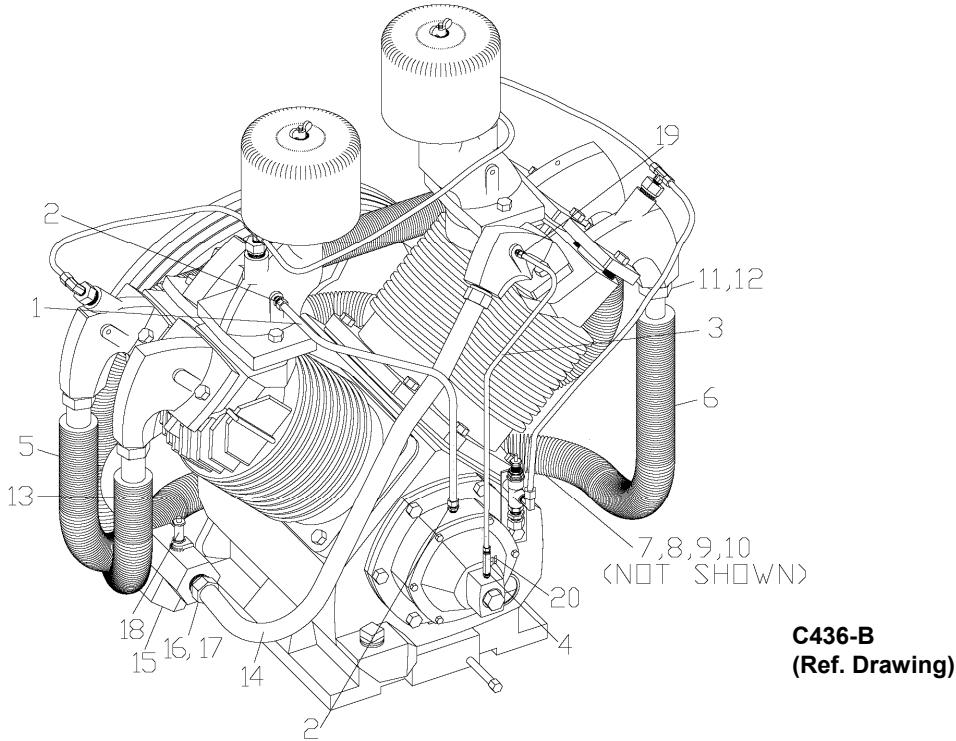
Replacement Parts Illustration for Tubing Assemblies
